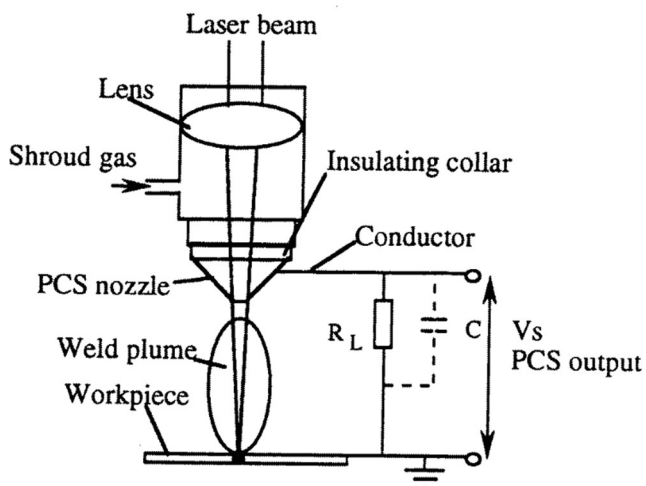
Schematic of a weld head mounted vapor charge probe [539]
